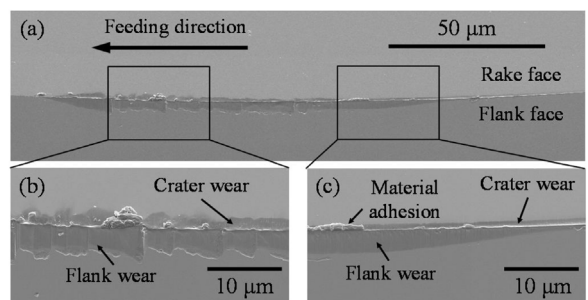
SEM images of tool edge after cutting: (a) general view, (b) close-up view of left side, (c) close-up view of right side.
